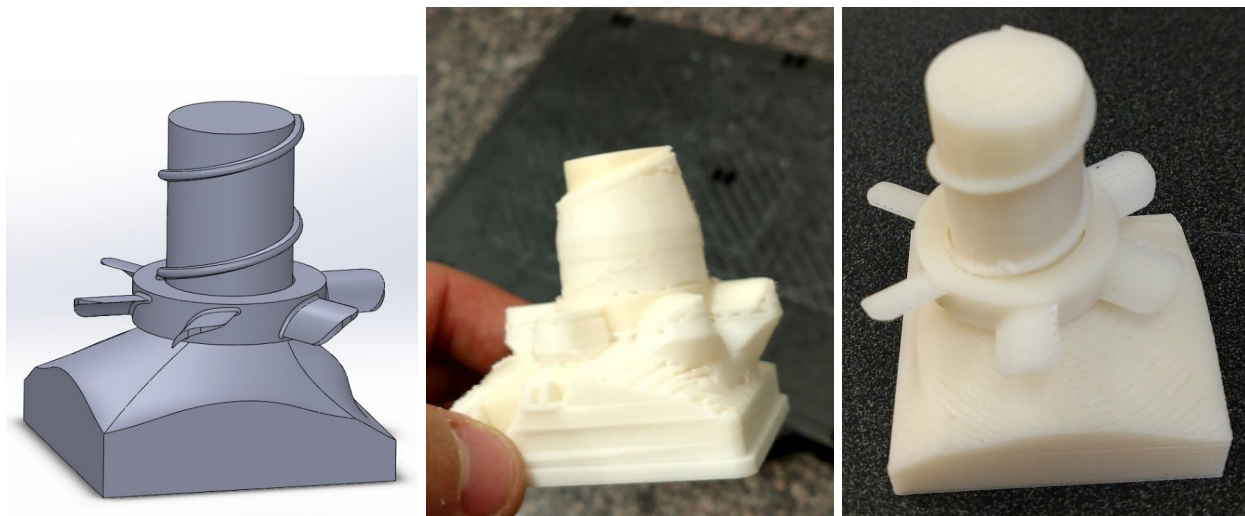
Revised design CAD file (left) and final print with support material (middle) and after support removal (right).
